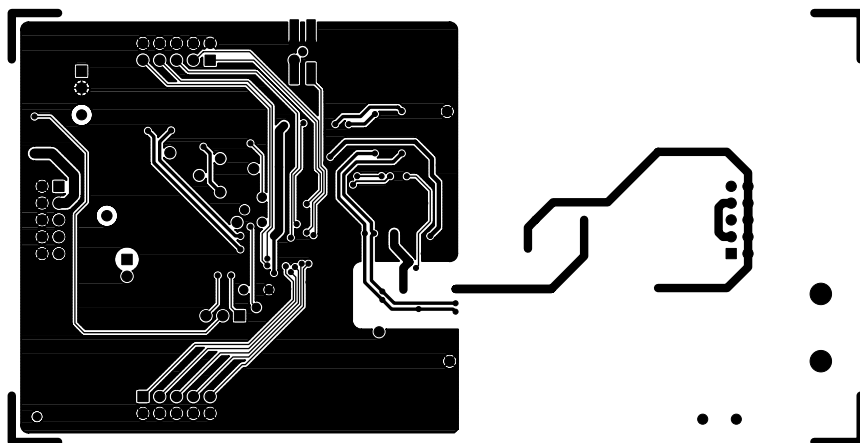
Si321xDC-EVB with Si3201 Solder Side
